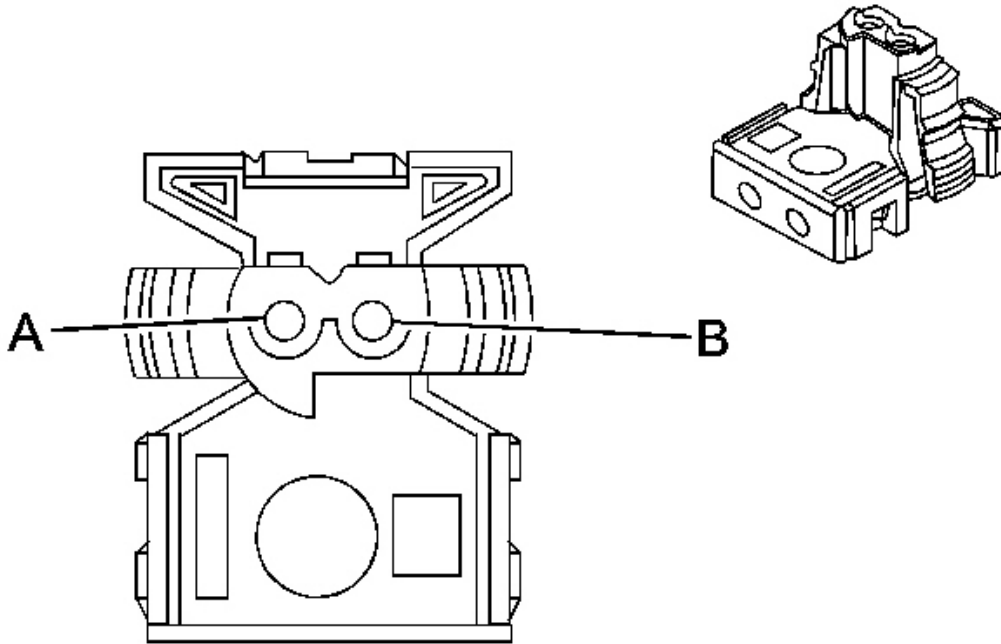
Inflatable Restraint Steering Wheel Module C1 Connector End View
